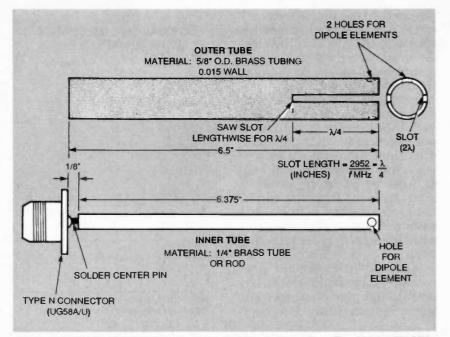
PRE-ASSEMBLY DETAILS of the feedline/balun tubes. For 400 to 470-MHz operation of the corner-reflector antenna the outer tube length should be increased to 14 inches; the Inner tube, 13.785 inches.
